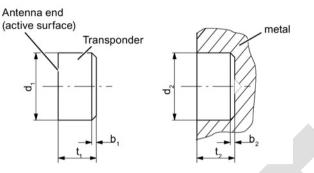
Flush-mounting of MDS D421/D521/E623 in metal with tools
